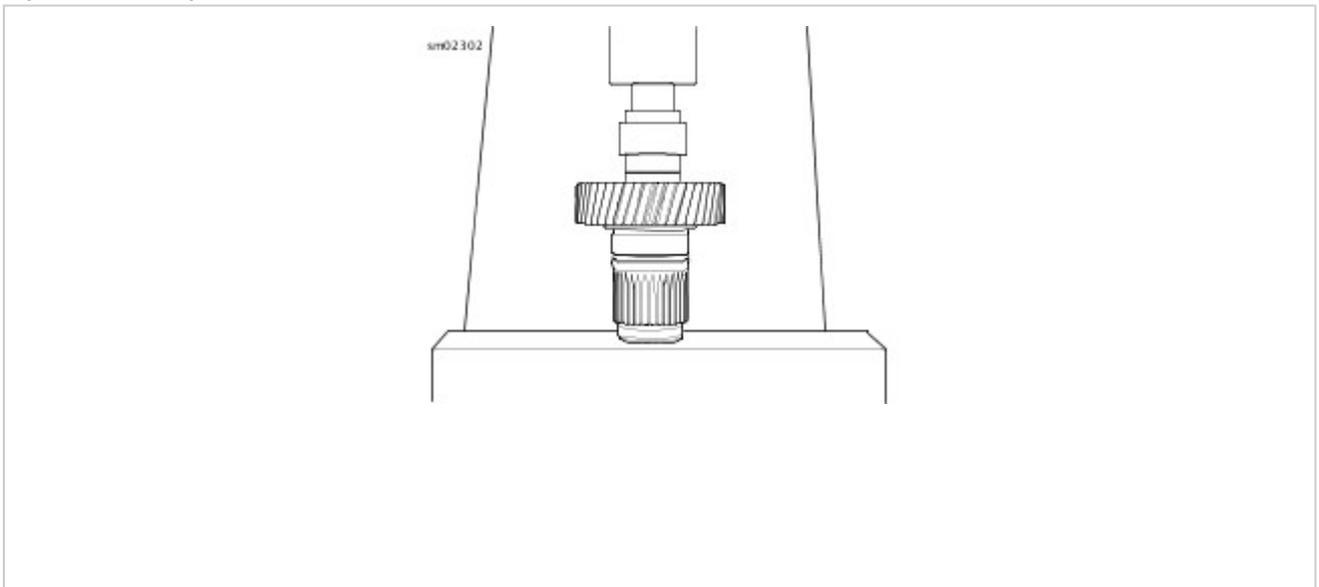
Installing Inner Needle Bearing in Main Drive Gear
